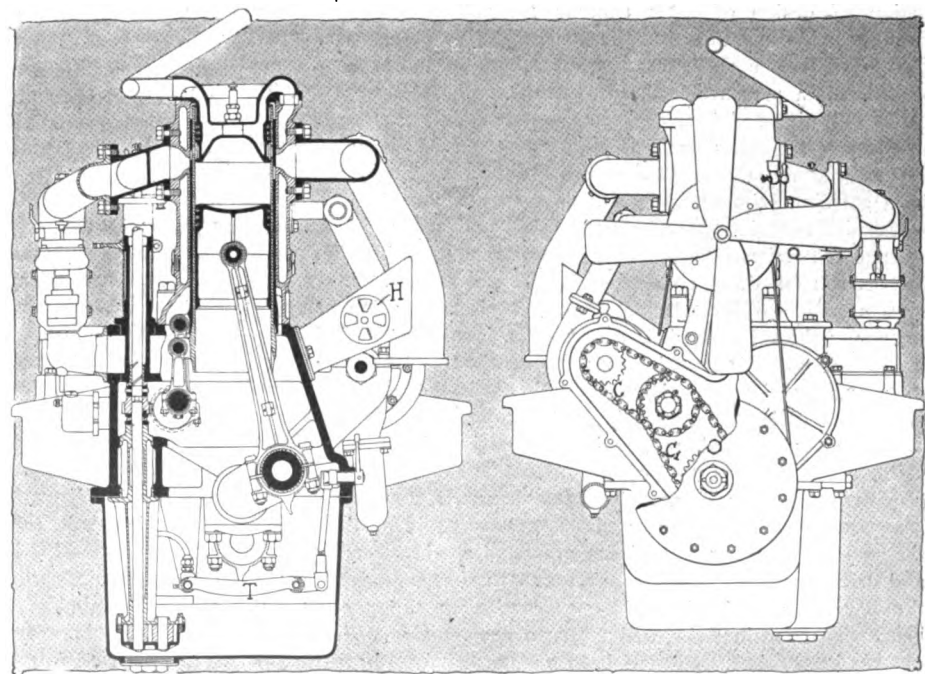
Transverse section through Knight motor and view of chain drive to magneto shaft
